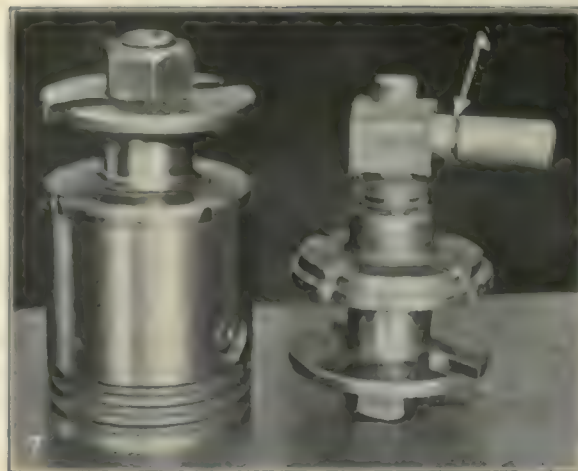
MANDREL FOR HOLDING PISTON IN GRINDING MACHINE
